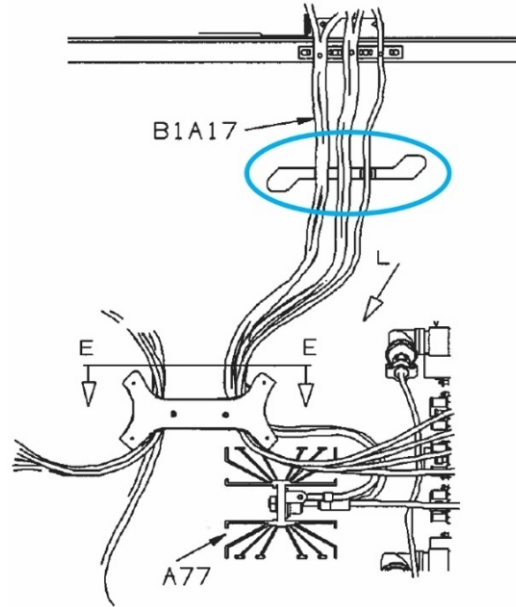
A detail excerpt from the Completion and Finishing of Power C/A Card showing the power cable routing under the left strip assembly. (Courtesy of Leonardo Helicopters, modified by NTSB)
